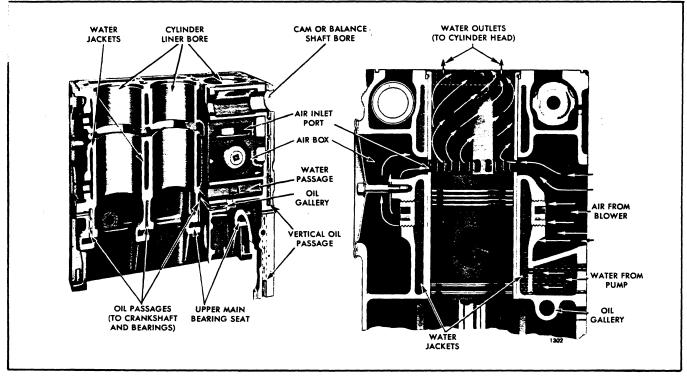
Cutaway View of Cylinder Block Showing Air and Water Passages
